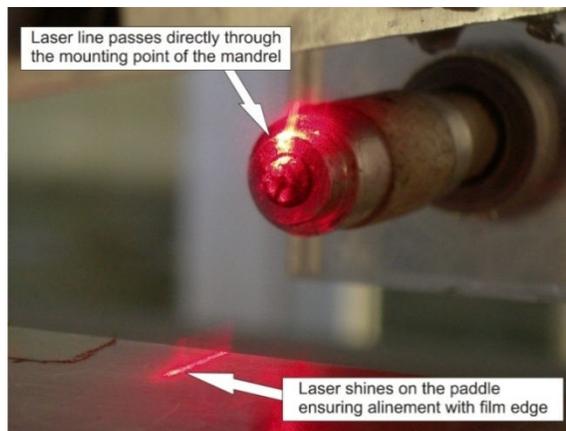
Laser Line Projecting Mandrel Location on Paddle
